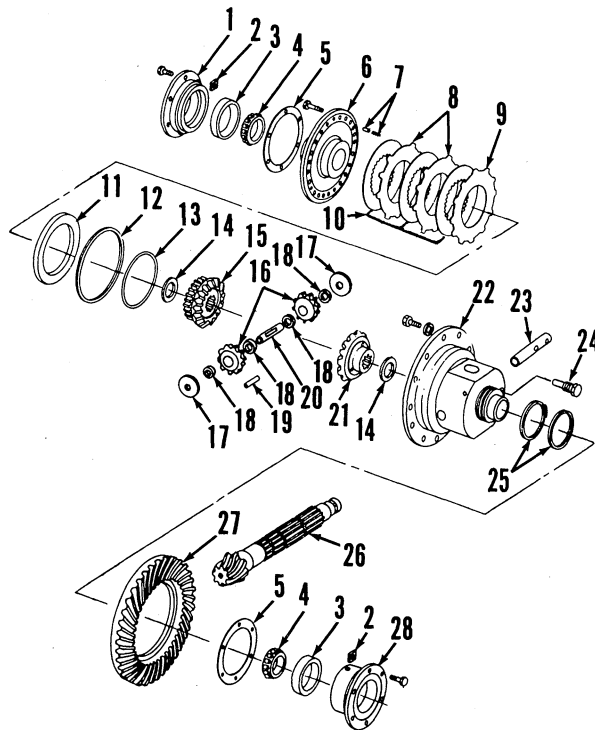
Exploded view of differential assembly used on early 4050 models equipped with Quad-Range transmission. Differential assembly used on early 4050 Power Shift models is similar except components are switched end-for-end to position ring gear (27) on opposite side of differential drive shaft (26).
